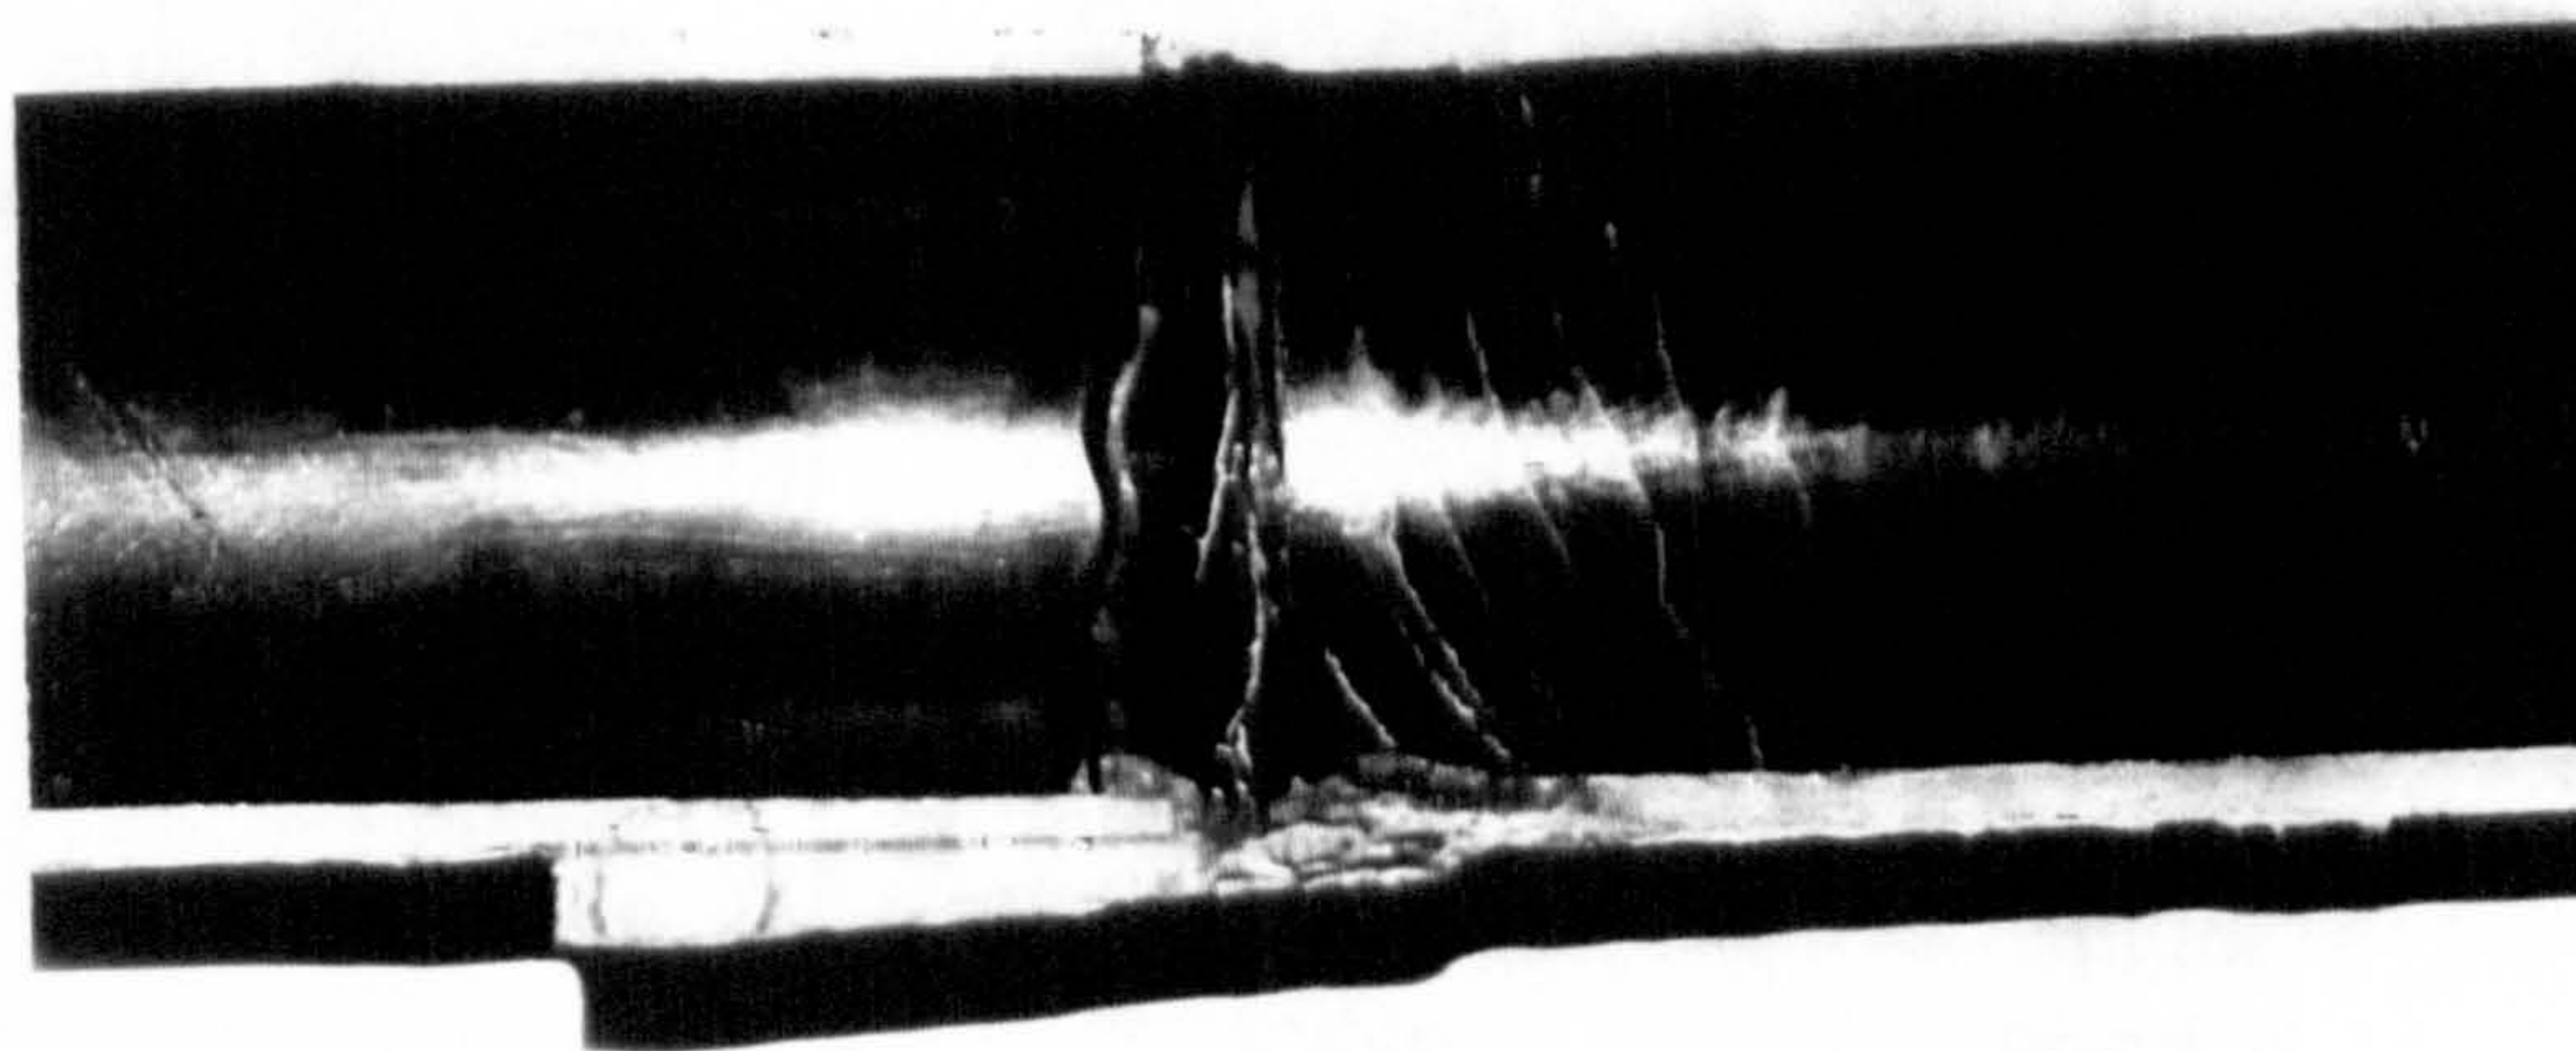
Inside failure appearance of the socket/spigot joint tested. Cracks observed in the bore hole were mostly located in the area near the bottom of the socket and propagated in hoop direction.
